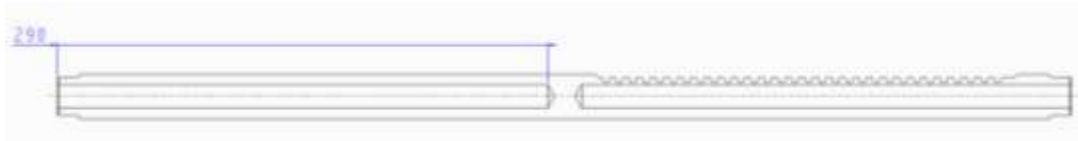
Rack with Gun Drill Hole Length of 290mm
